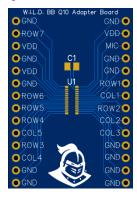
An adapter board for the Hirose BM14, with traces following to through-holes for convenient soldering
